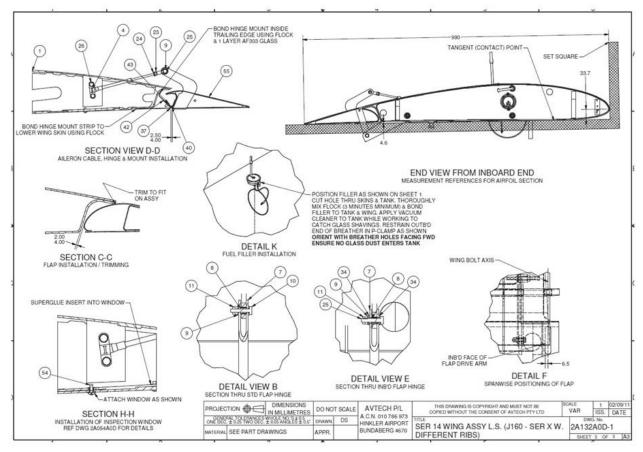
J160 Wing Assembly Sheet 3, Ser XIV (J160)
